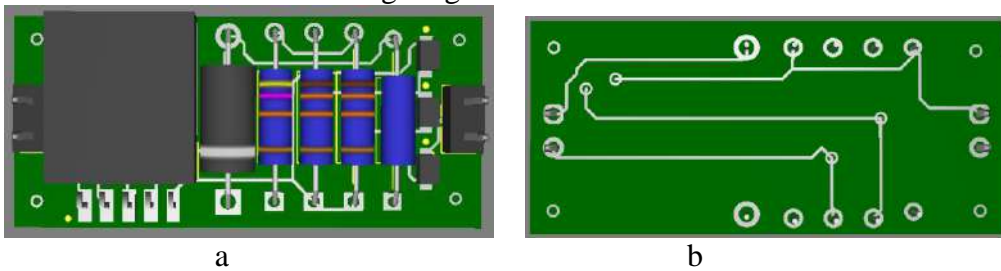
3D model of the voltage stabilization unit board, a - top view, b - bottom view
